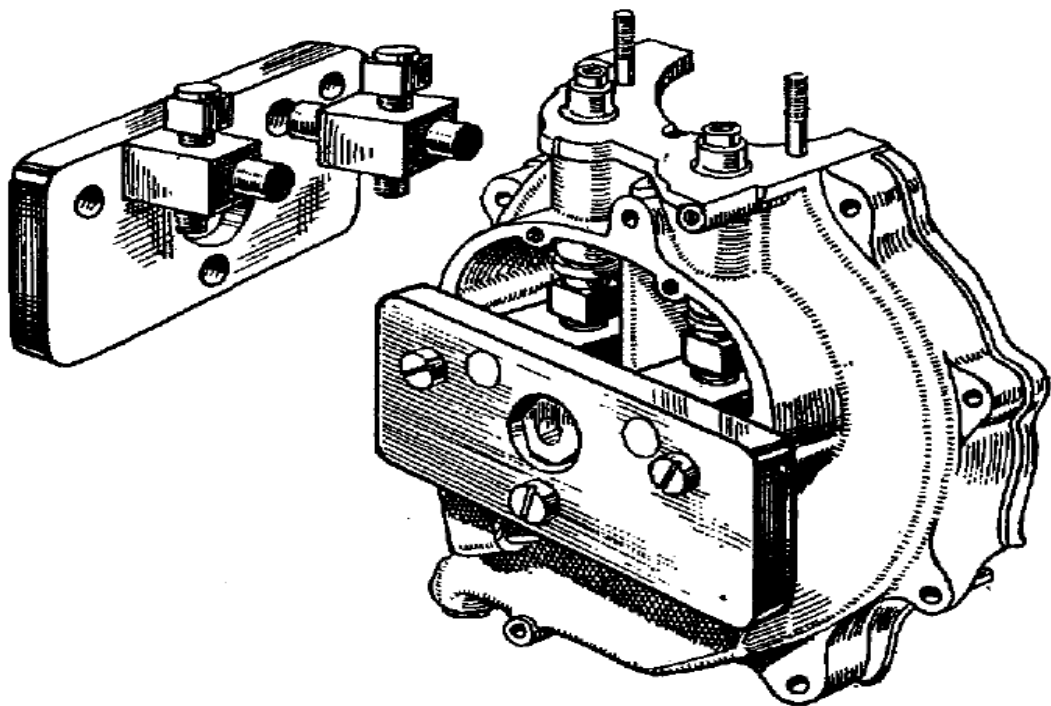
TAPPET-GUIDE REMOVING FIXTURE.
